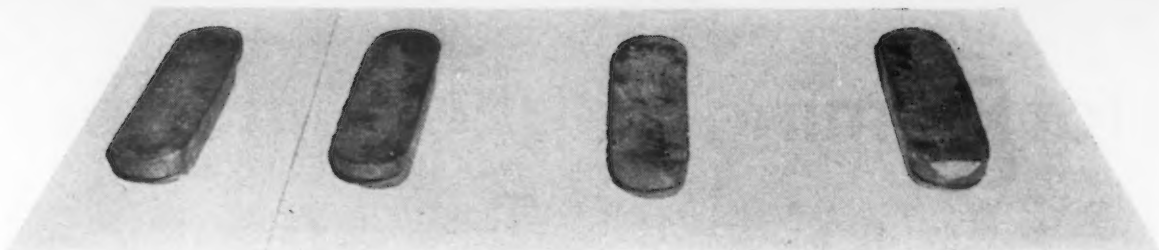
Asbestos held in place by lead pigs, is used to cover the heating plate and sheet.
